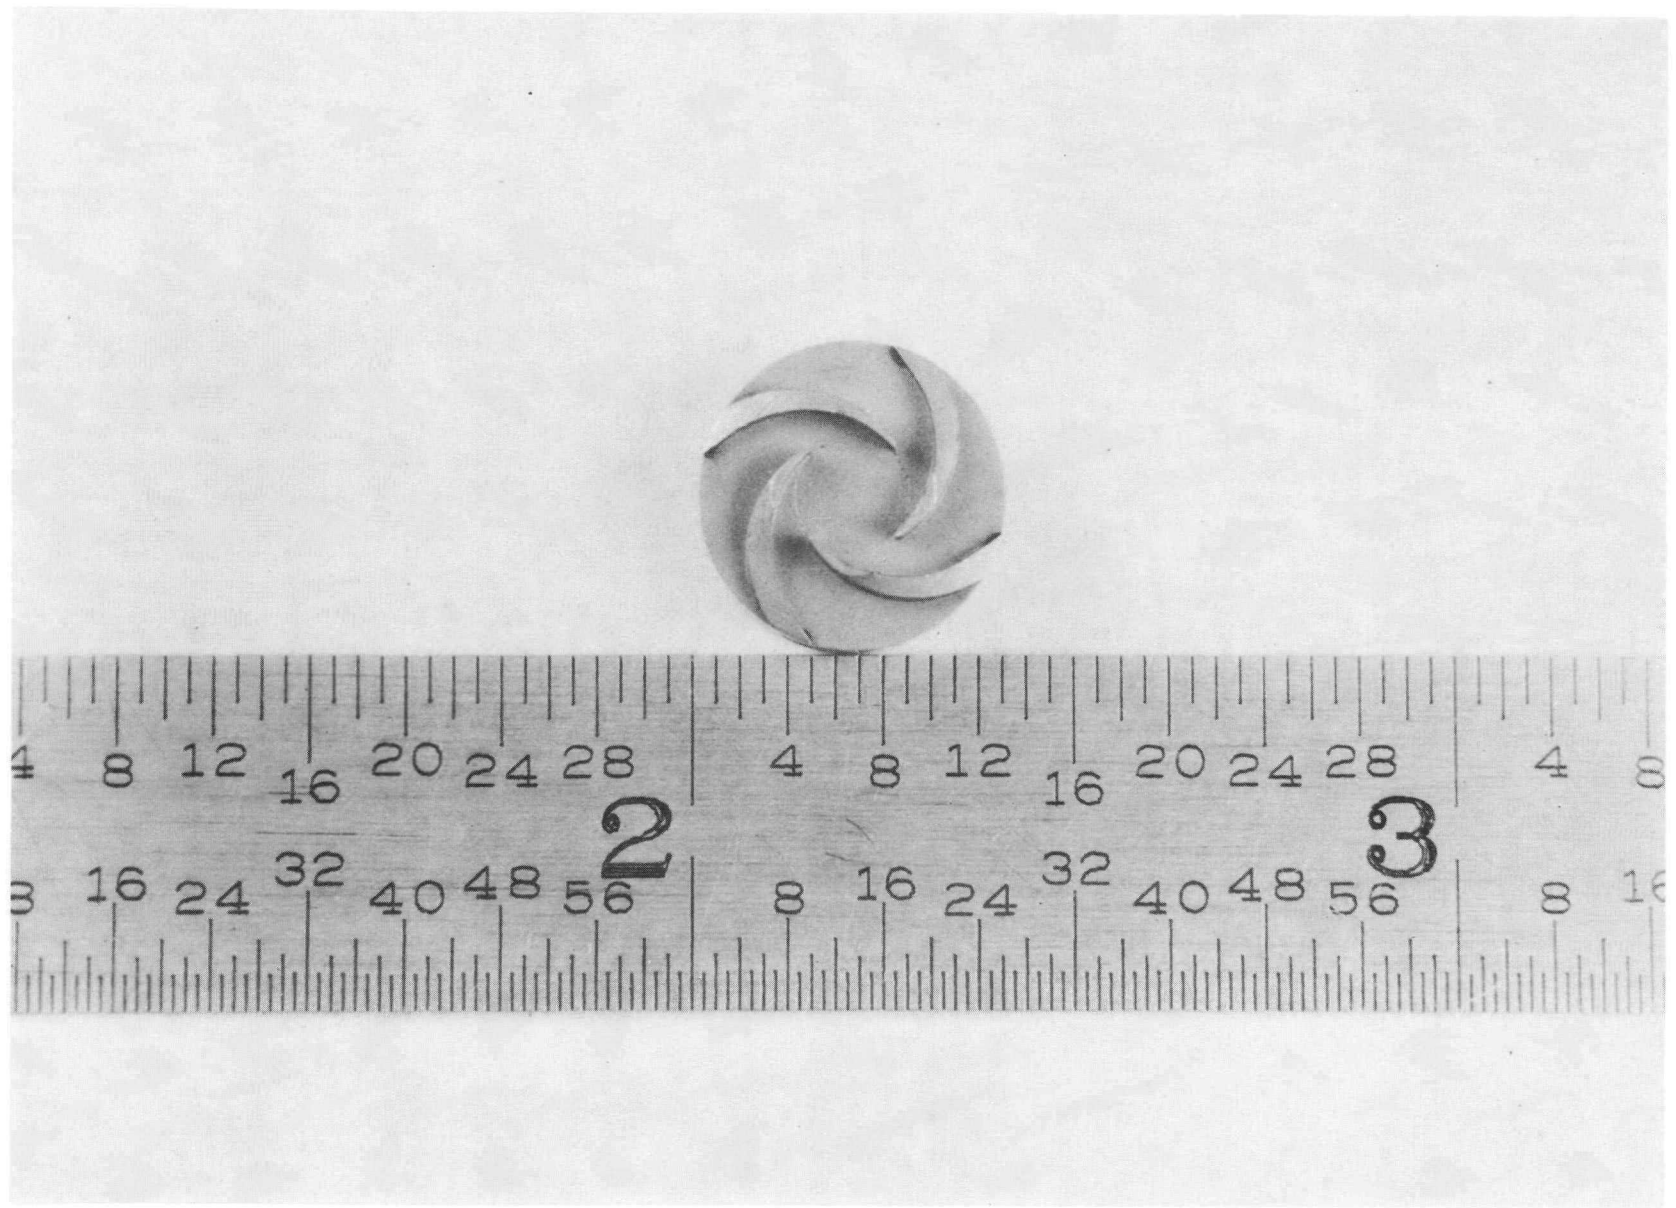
Preliminary Prototype Parts of Pump Scroll and Impeller
